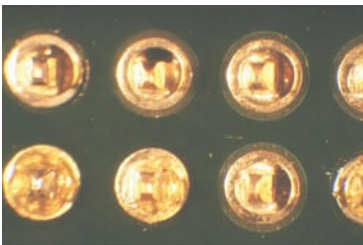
Inconsistent solder fill of the plated through-holes during pin in hole reflow.
